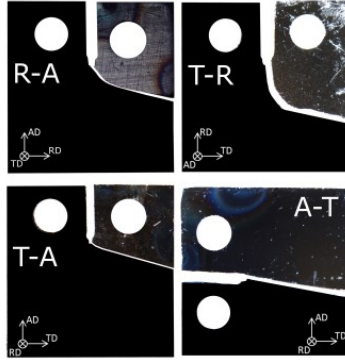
Illustration of the macroscopic fatigue crack paths in R-A, T-R, T-A and A-T specimens.
